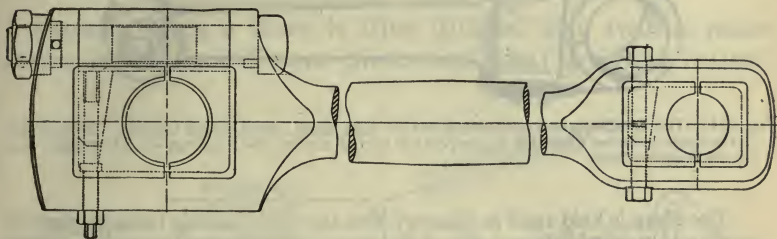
The "hatchet" end type of connecting rod as used on the Harris-Corliss engine. A desirable form for large engines, permitting easy removal of the brasses.
